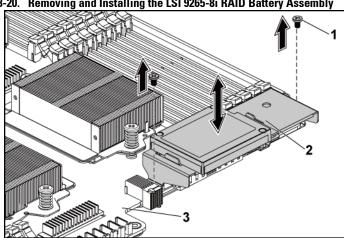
Removing and Installing the LSI 9265-8i RAID Battery Assembly
